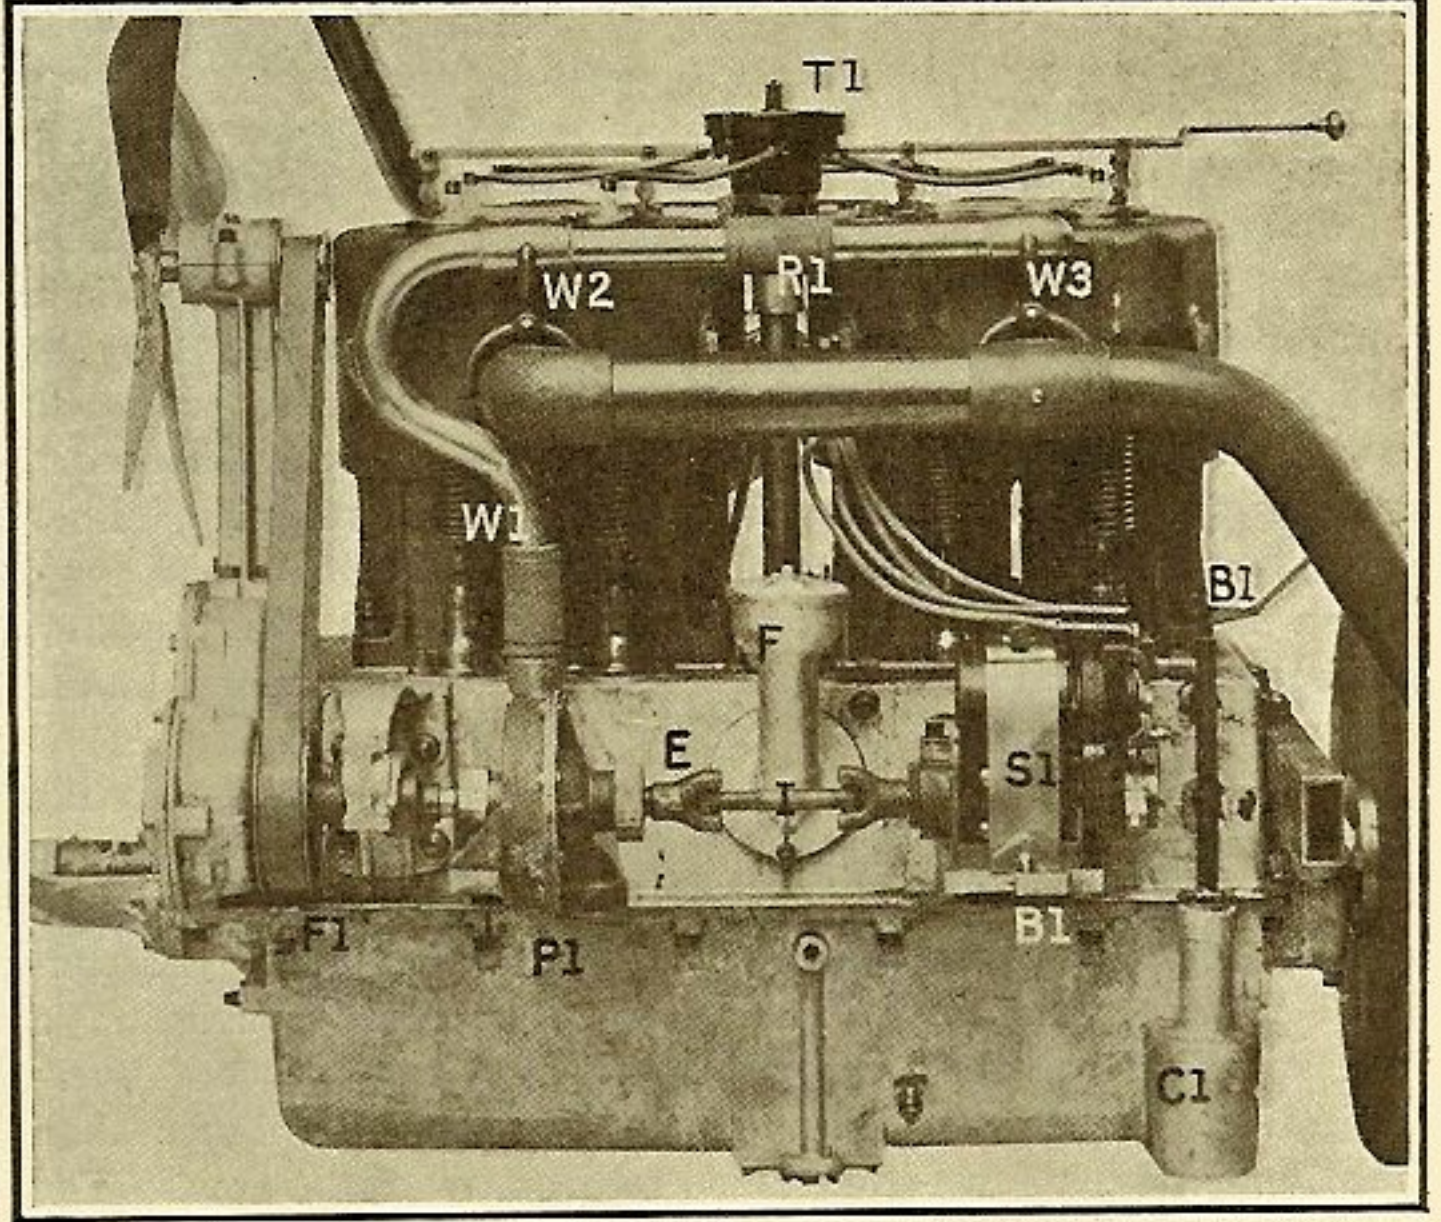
View of the exhaust side of the motor, showing magneto, water pump, oil filler hole and cork-float indicator housing
